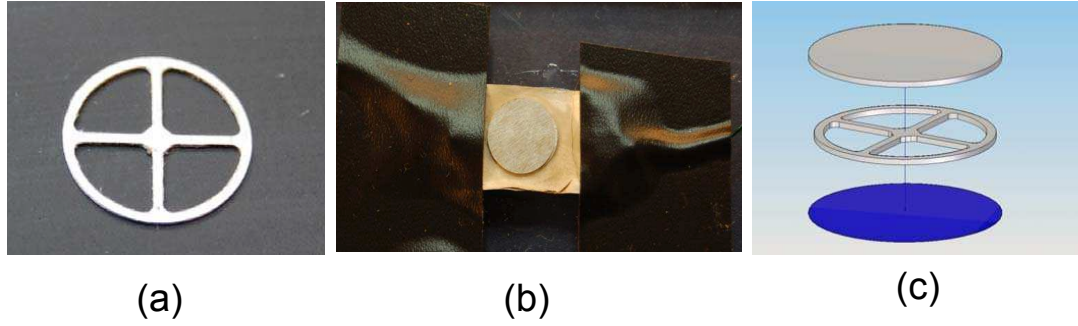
(a) The aluminum crosshair pattern. (b) Photograph of the assembled microphone. (c) Exploded view of the assembly.
